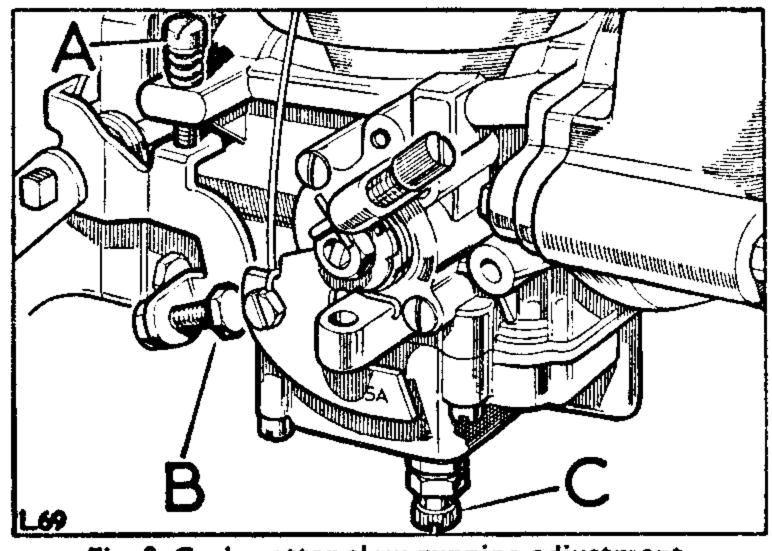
Carburetter slow-running adjustment, 6-cylinder Petrol models
